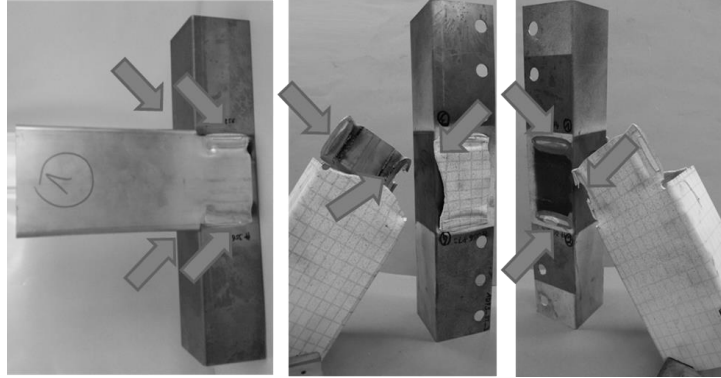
EMPT-joined component “T-joint” before testing (left) with 4 welding zones, 2 at each flange, marked by the arrow and one part after testing, 2 views (middle and right) showing the mixed failure ranging from debonding or partial debonding to flange failure.
